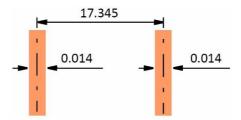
Tolerance interval of s1, specified as a gauge of two tolerance zones
